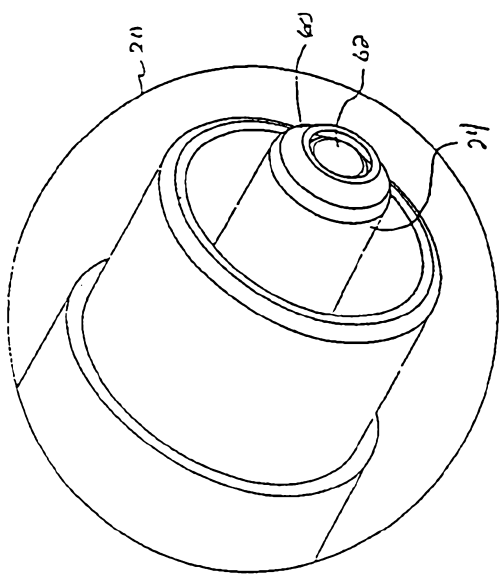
C ISO VIEW - TWO THIRDS ENGAGEMENT POSITION STOPPER BOTTOMED
